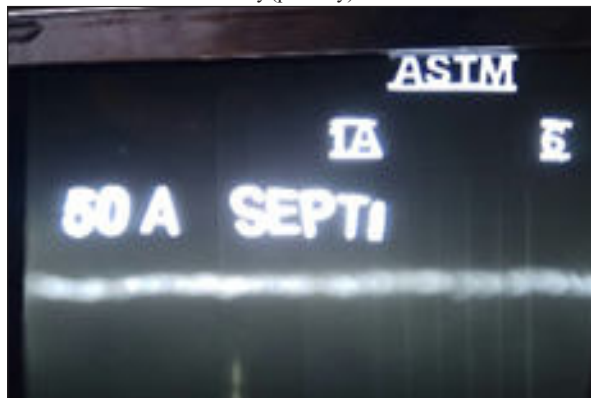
SS 304 Plate Welding Connection Number 2
